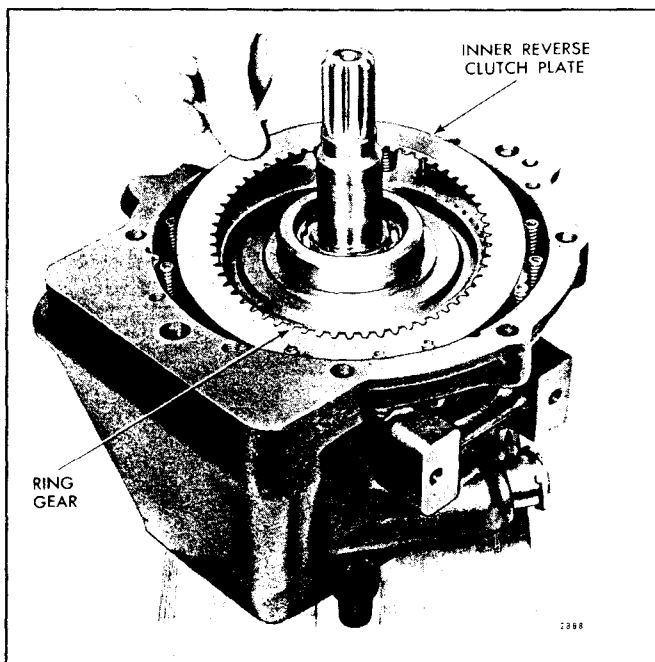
Installing Inner Reverse Clutch Plate in Gear Housing
